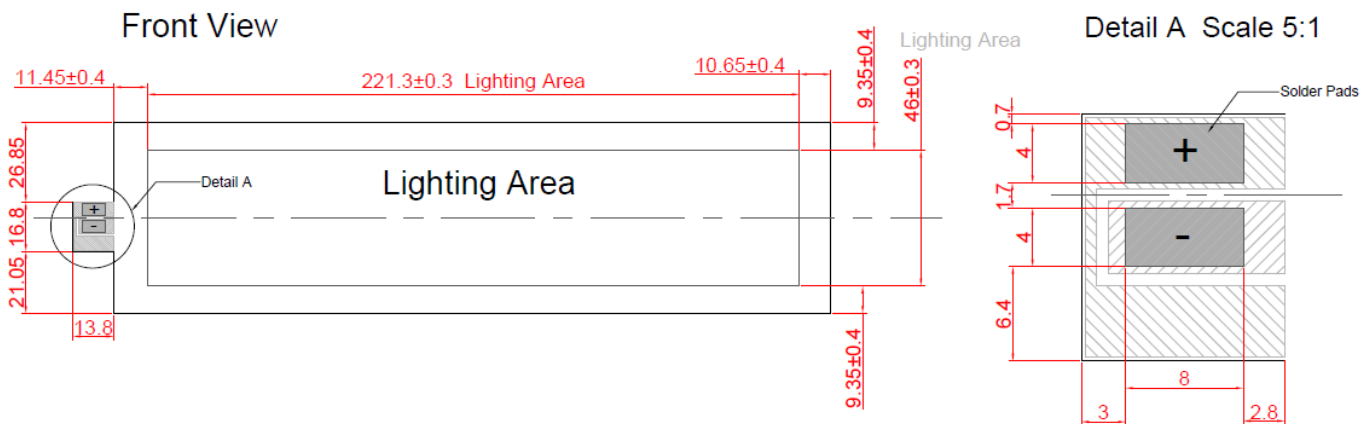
Brite 3 FL300C Level I and detail A showing the solder pads
